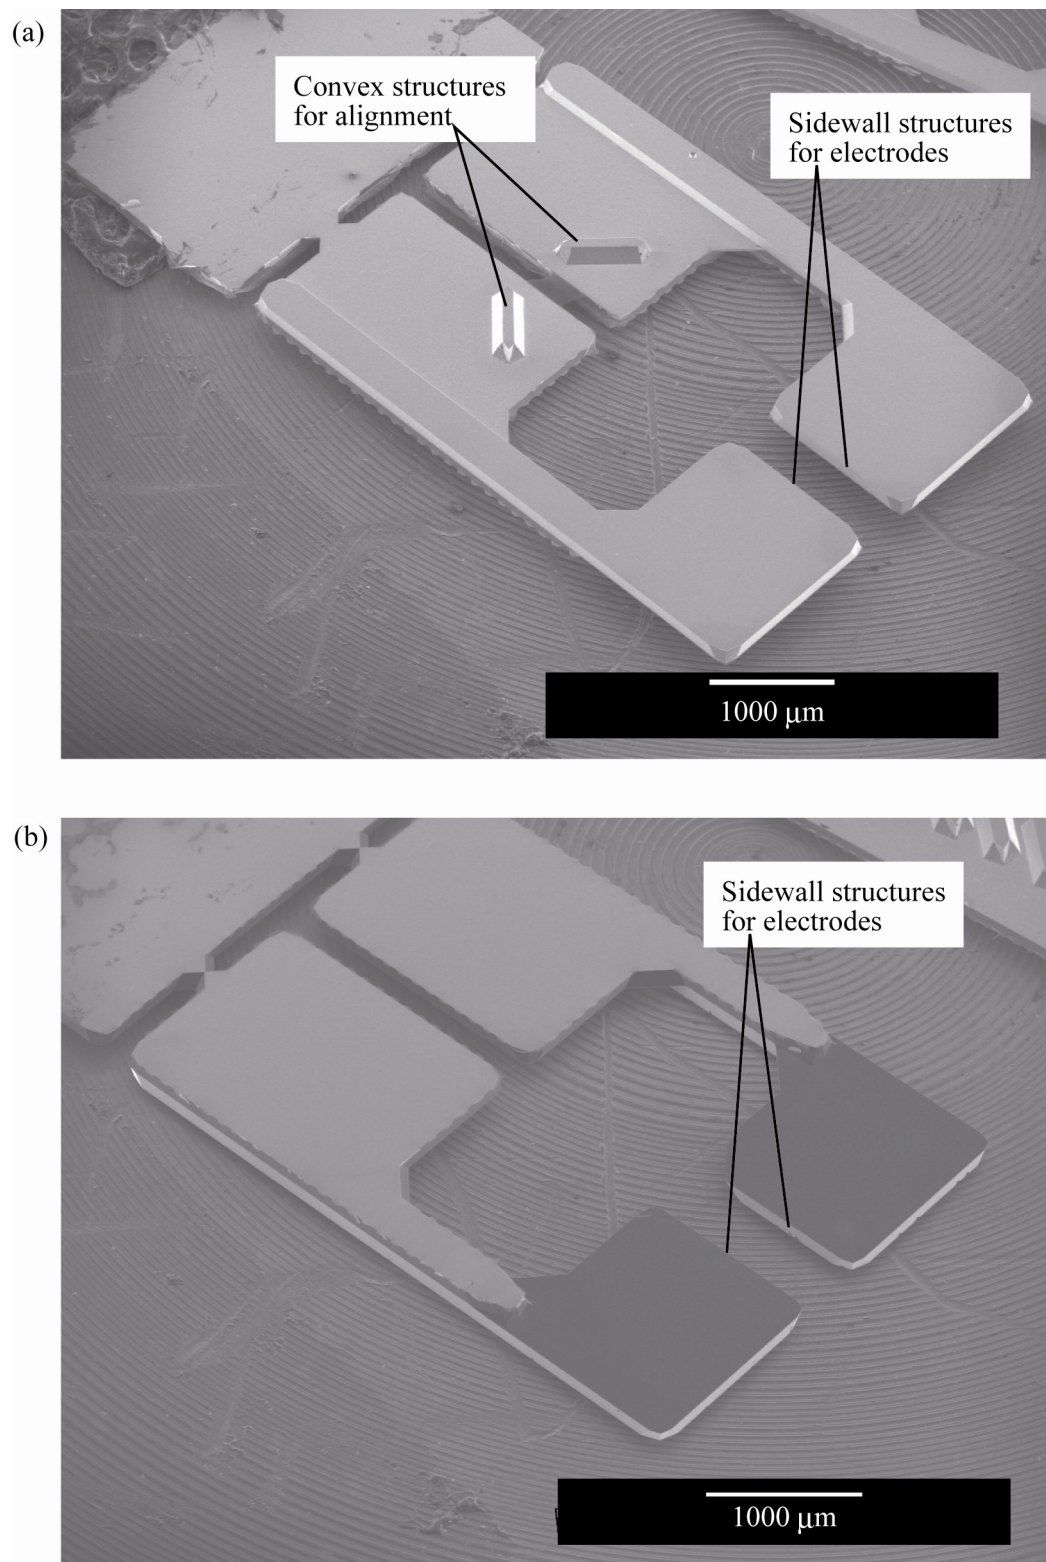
SEM images of a fabricated drive part. (a) Bird view of a bottom side. (b) Bird view of a top side.
